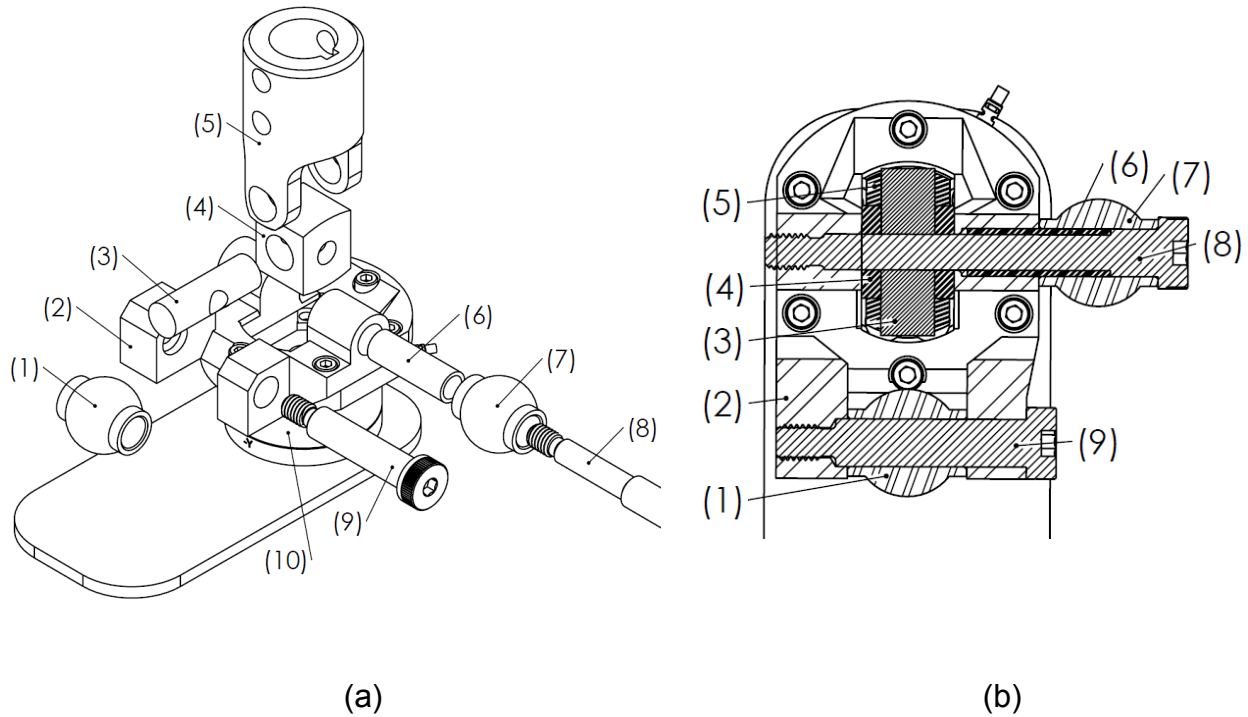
View of the internals of the AFS ankle mechanism design. (a) Exploded view of the ankle design. (b) Section view of the ankle design. 1) Pitch ball joint, 2) Ankle plate, 3) Cross shaft, 4) Cross block, 5) Yoke, 6) Bushing, 7) Roll ball joint, 8-9) Shoulder bolts, 10) Load cell.
